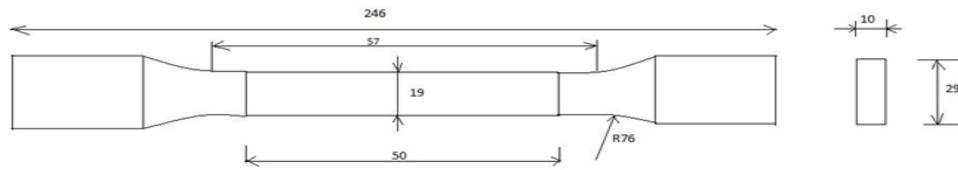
Specimen dimensions according to the ASTM D638-10 standard
